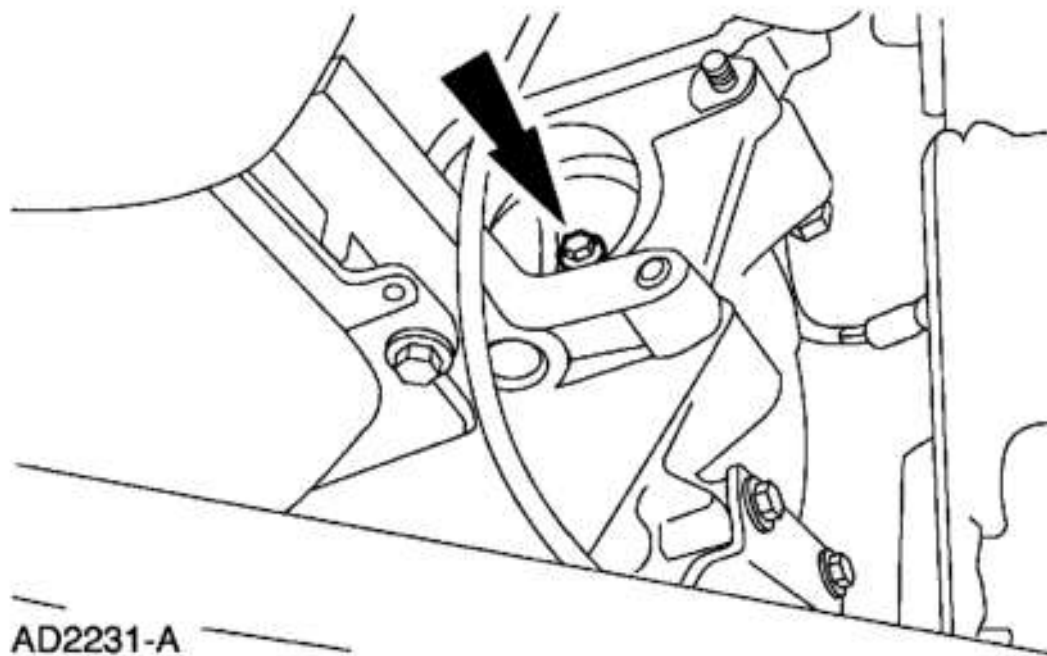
Removing Flexplate-To-Torque Converter Nuts
